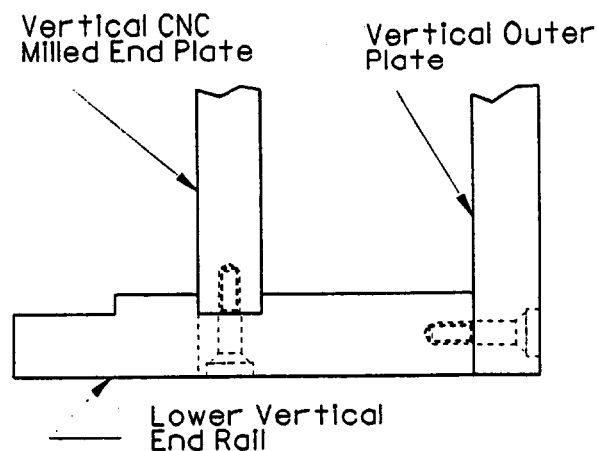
Assembly of the bottom rail to the vertical outer plate and the tube end plate.
